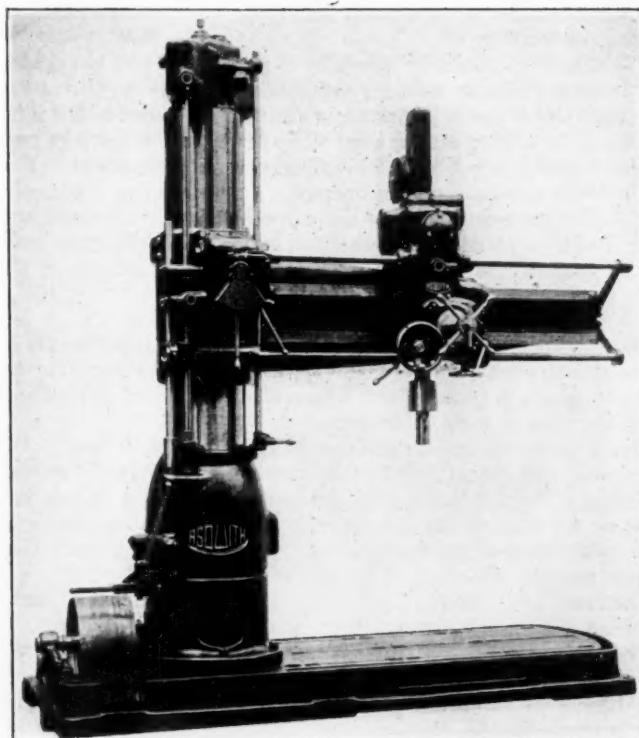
RECENT DESIGN OF MEDIUM-WEIGHT RADIAL DRILLING MACHINE
